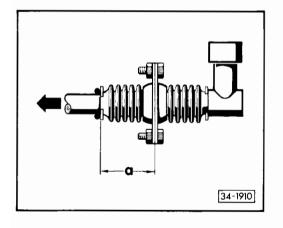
Previous dimension of flange on end shield a = 14.5 mm
